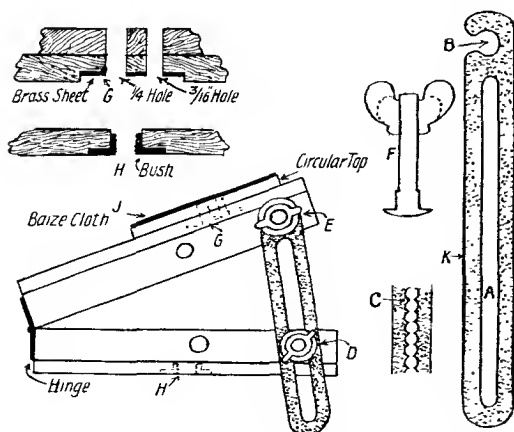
Details of tilting top fittings. Strut (K) is made of $\frac{1}{16}$ -inch brass, the slot (A) being made by drilling a series of holes as at C. Details of the threaded bush (H) and circular block are also shown
